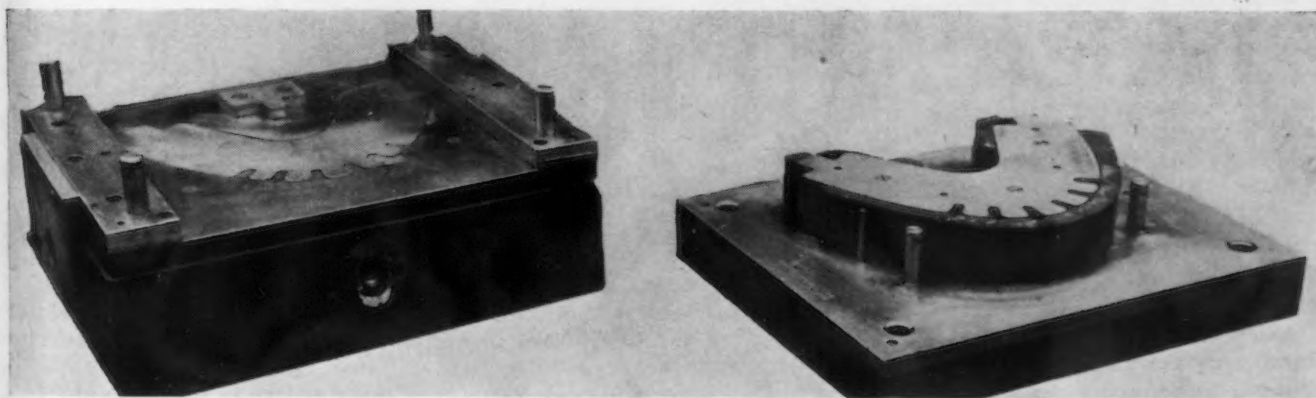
Blank and pierce die for the skin stiffener shown in Fig. 1. Die at left is made up of steel parts fastened to a 4-in. plastic base. Punch at right is made of Kirksite faced with alloy steel and mounted on a mild steel plate backed with a laminated paper plastic base.
